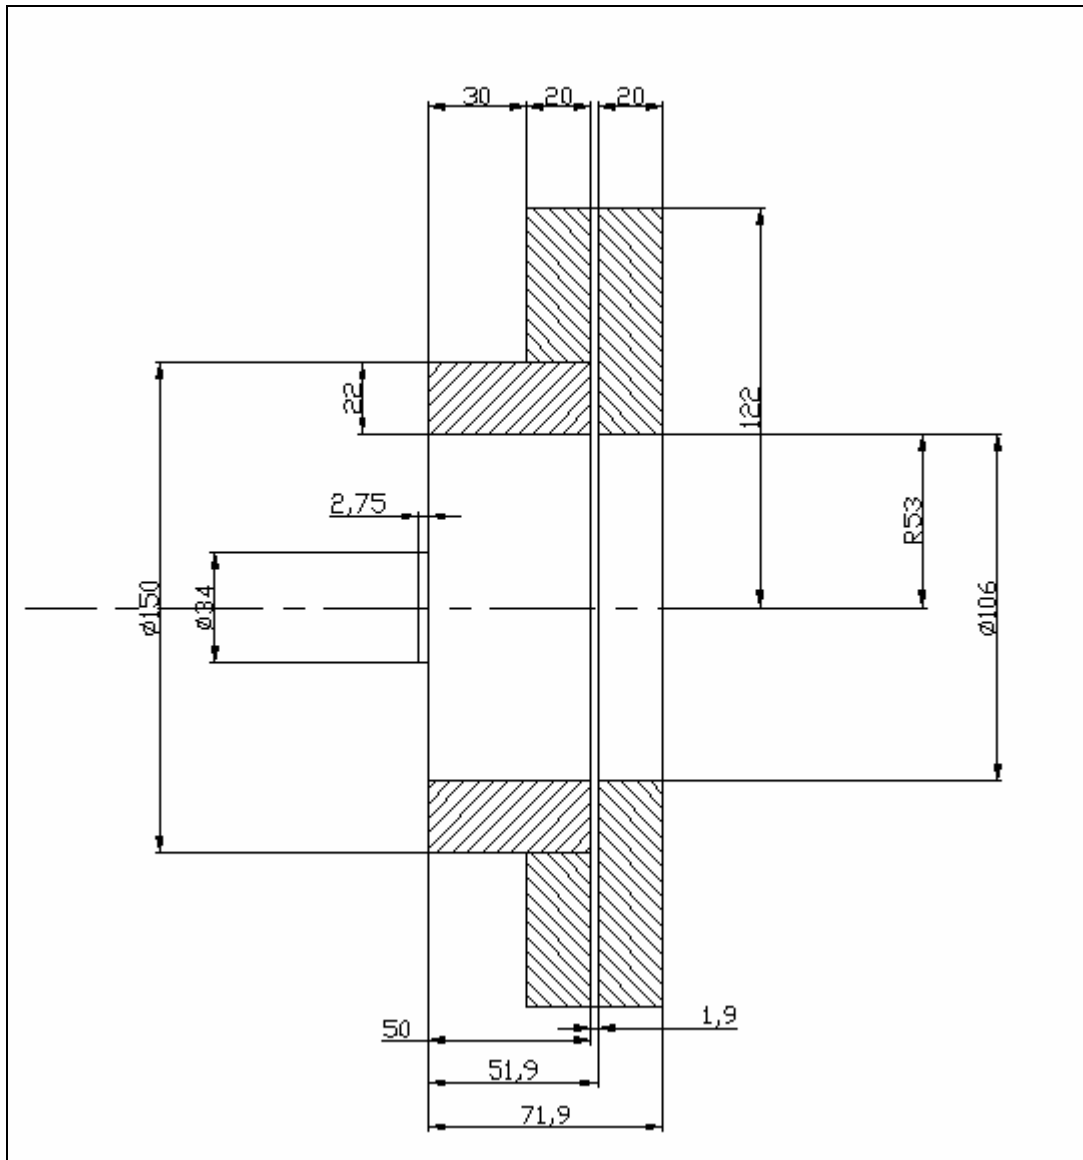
The design of the test tube (length 25 mm) and clamped plates
